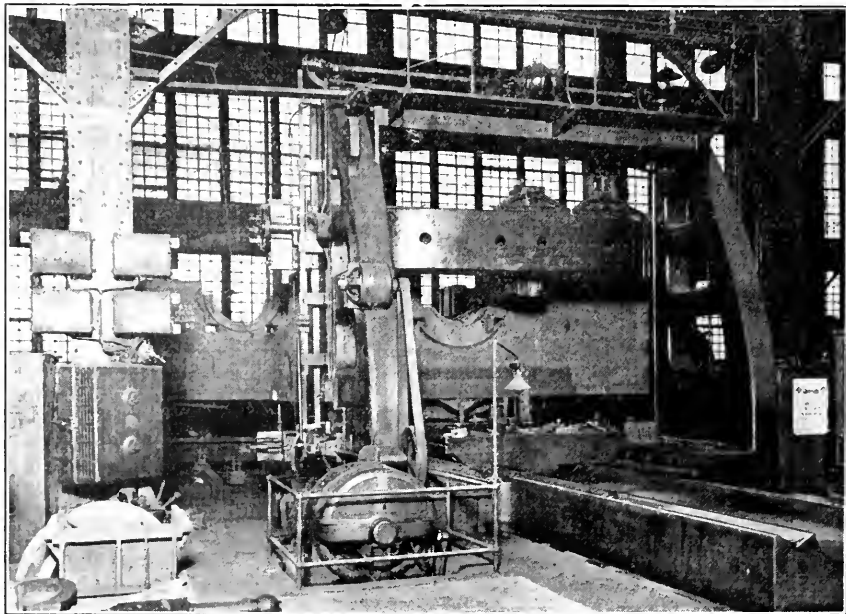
A 14-FT. BY 30-FT. PLANER EQUIPPED WITH A 75-HP., FOUR-TO-ONE ADJUSTABLE-SPEED REVERSING MOTOR (CONTROLLER ON NEARBY COLUMN)
